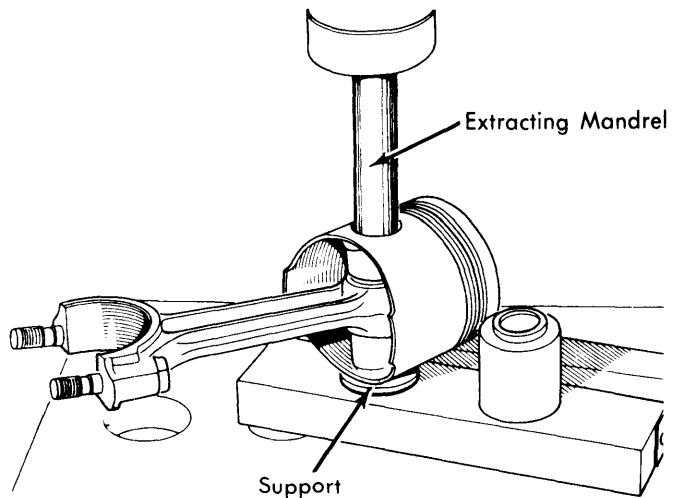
Special Tool Assembly Mot. 255 for Extracting Piston Pin
